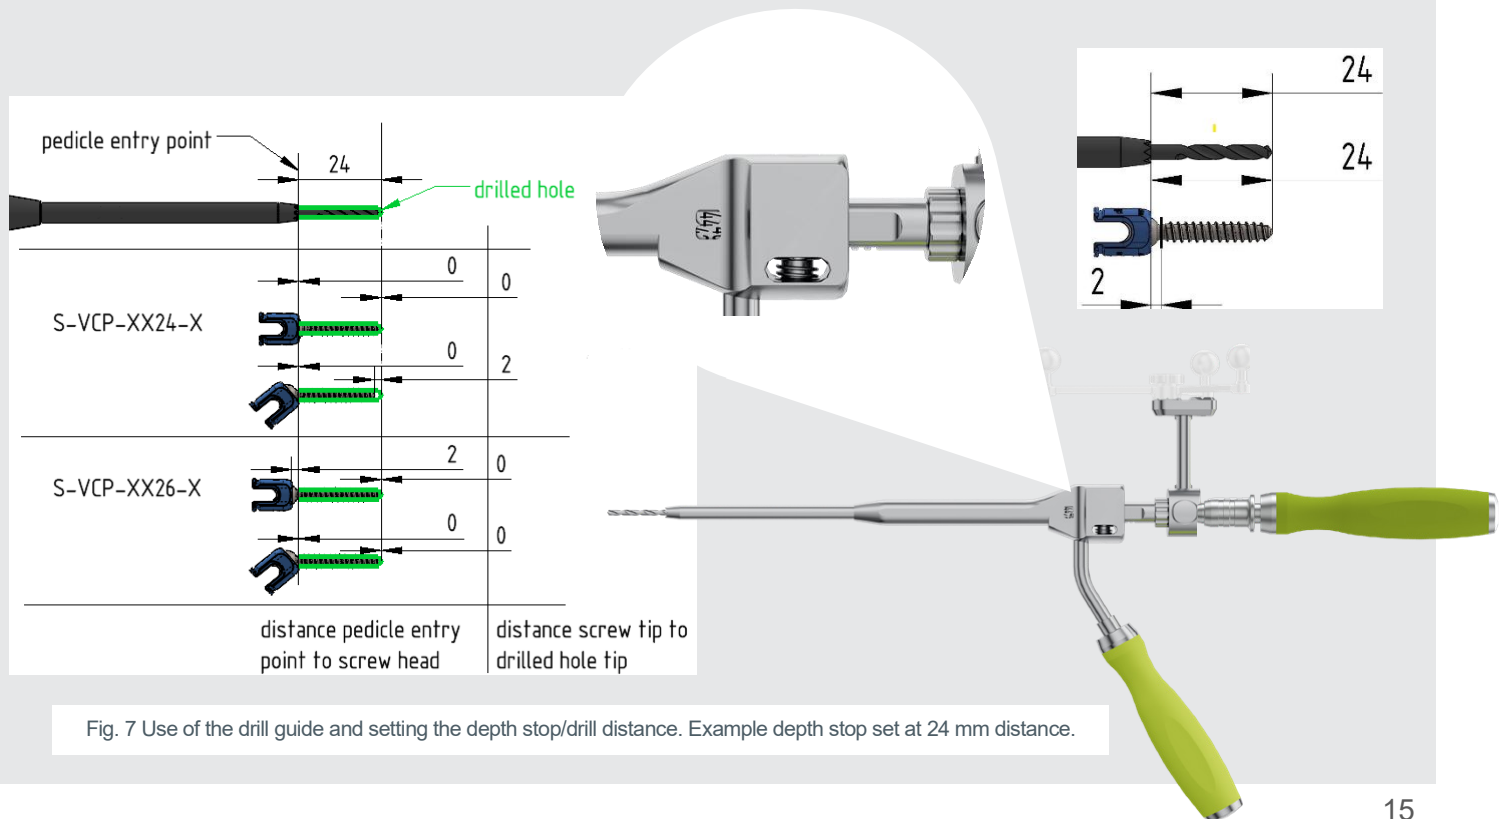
Use of the drill guide and setting the depth stop/drill distance. Example depth stop set at 24 mm distance.
